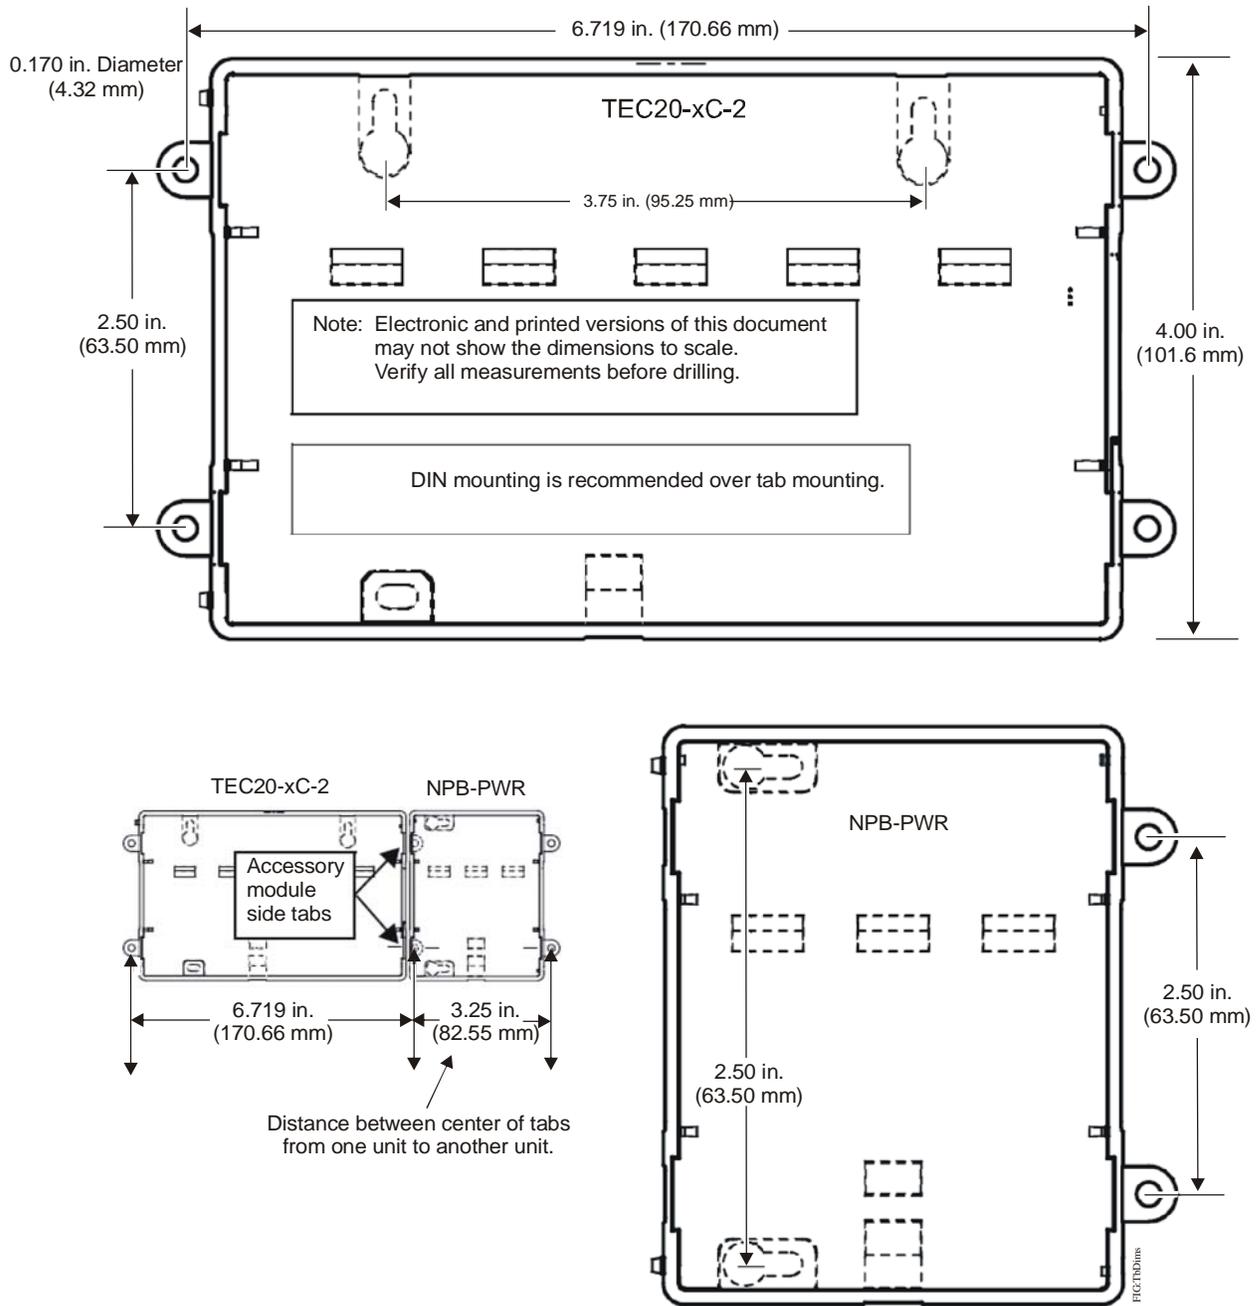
TEC20 Coordinator and NPB-PWR Module Dimensions, in. (mm)
